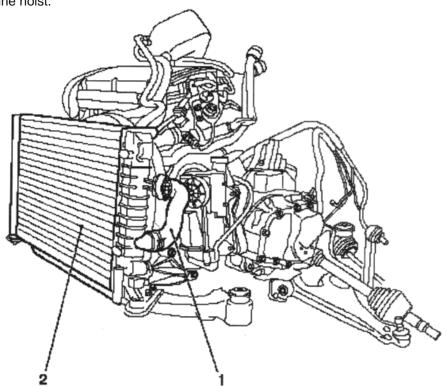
Disable Module Radiator: 1 - coolant hose, 2 - module heatsink
